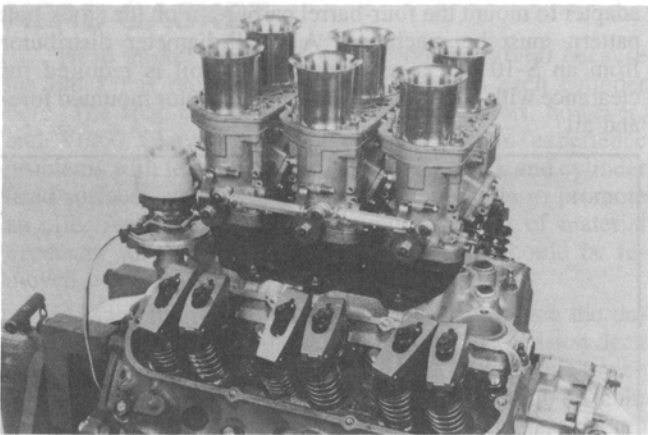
Triple Weber two-barrel carburetors on modified V6/60 multi-port fuel injection manifold.
